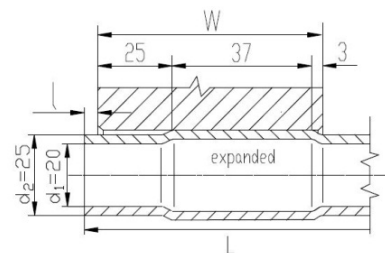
The detail expanding structure of tube-to-tubesheet joints, mm.
